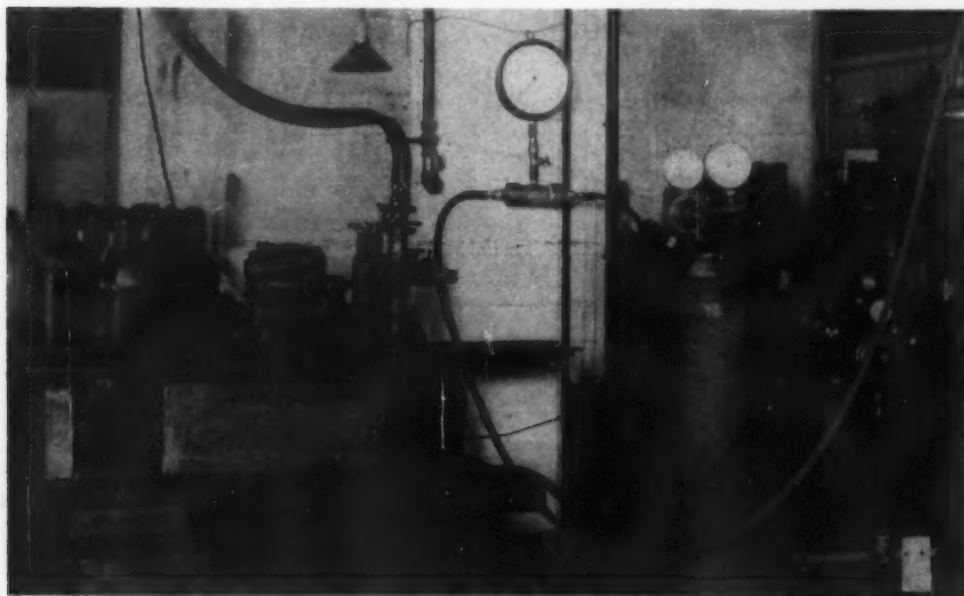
The Radiograph, Geared to Variable Speeds, Which Was Used in the Cutting Tests
